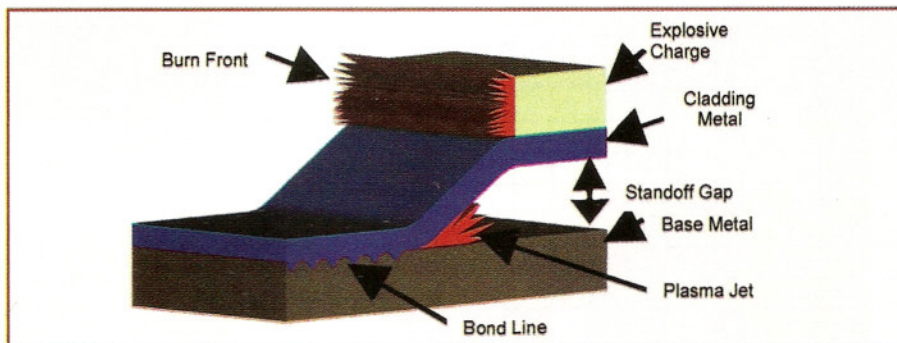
Artist's rendition of the dynamics of the explosion welding process.
